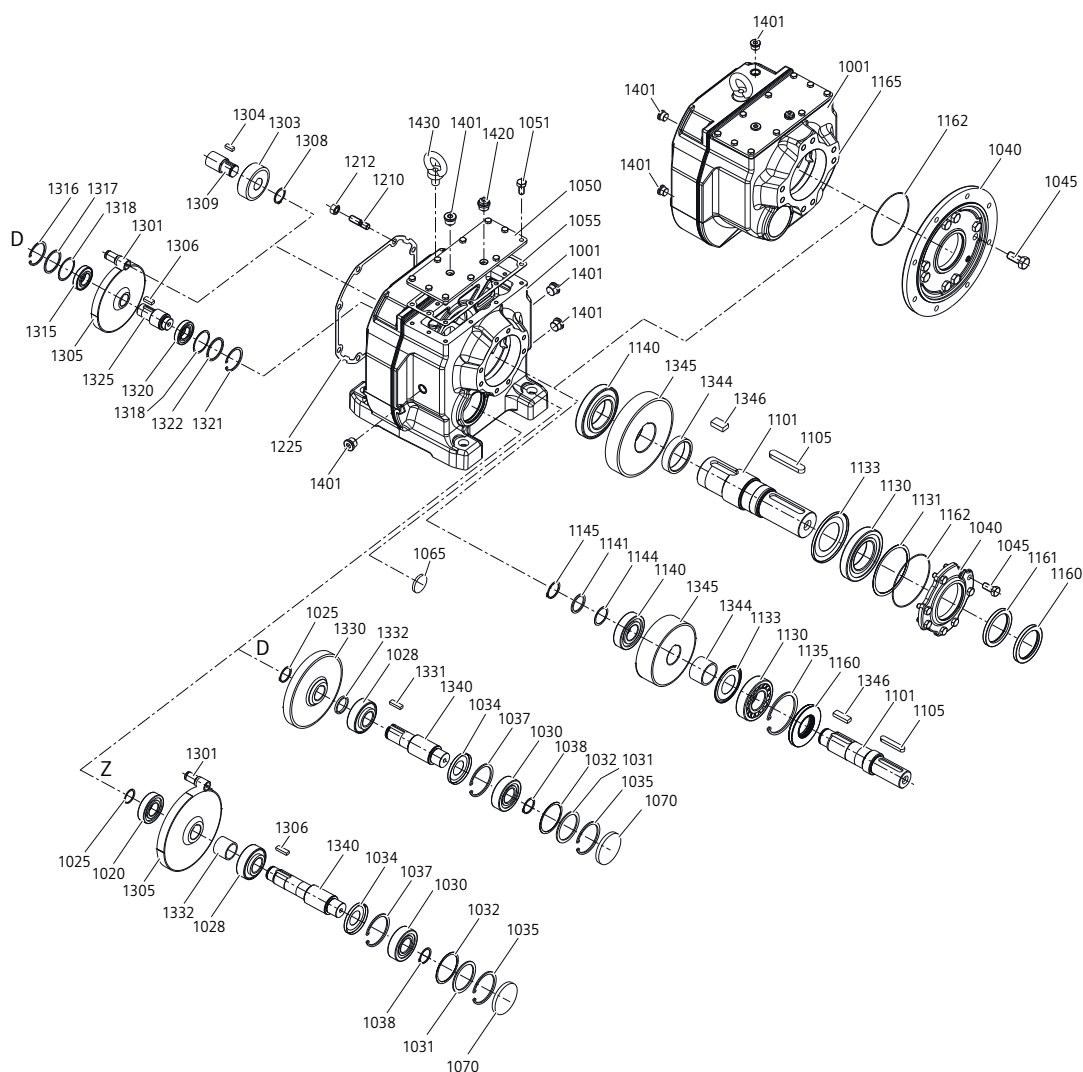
Helical gearbox D / Z, sizes 19 - 189
